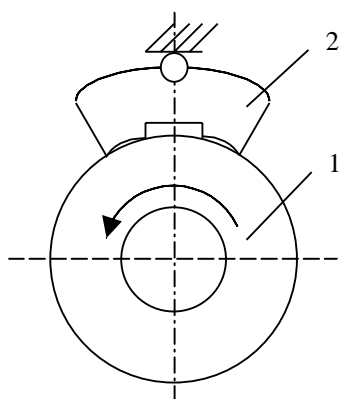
Friction pair shaft – pad: 1 – rotating shaft, 2 – friction pad.
